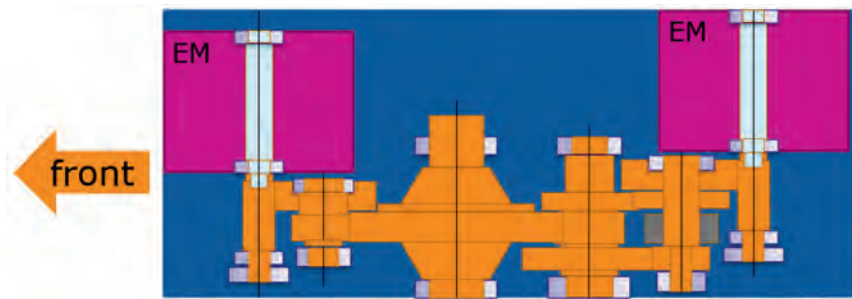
2-dimensional sketch of the gear layout to demonstrate the length-optimized gear arrangement
